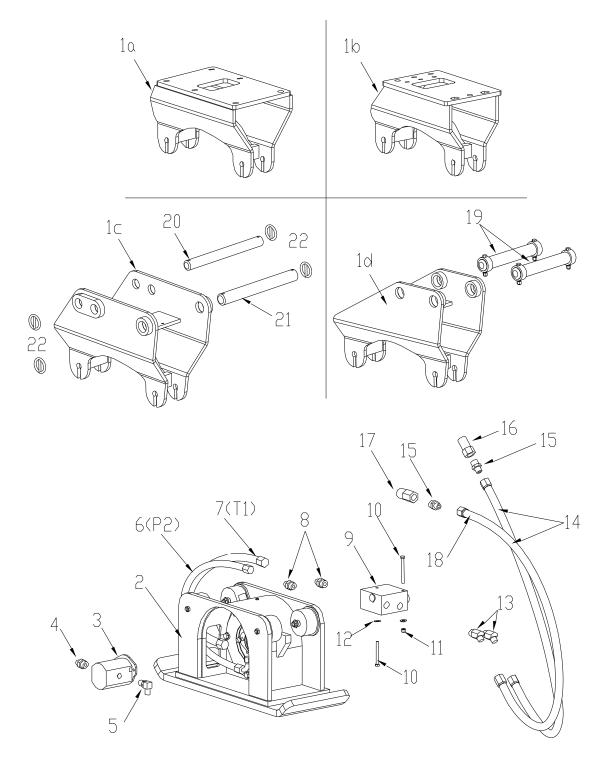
Model 500 Mounting Frame & Hydraulics
